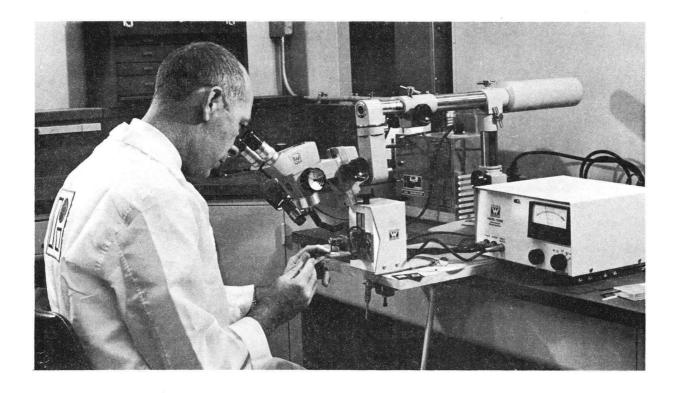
Attachment of Components to Multilayer Laminated Boards, Using Microwelder
